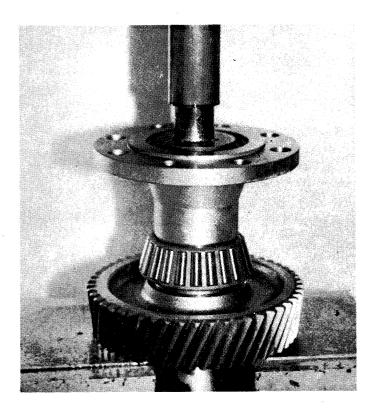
Pressing output shaft from rear bearing inner race and pinion.
